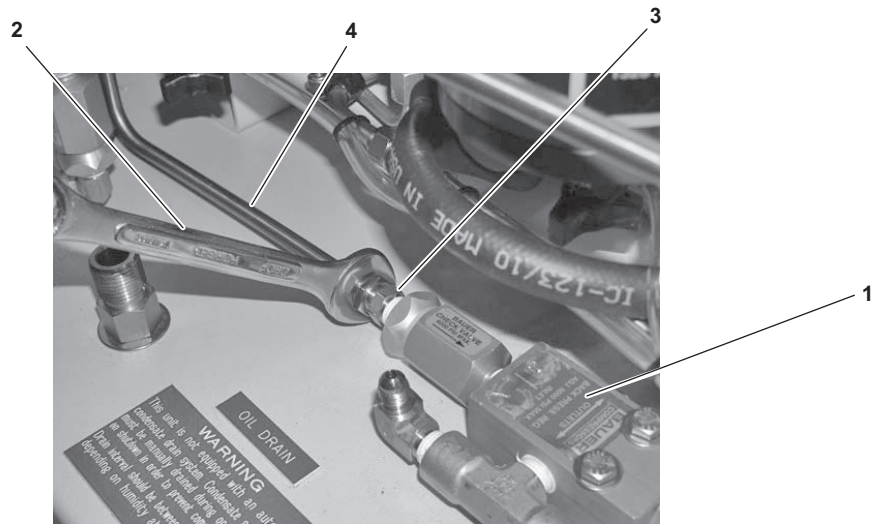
Remove Flare Fitting on Line to Pressure Maintaining Valve
